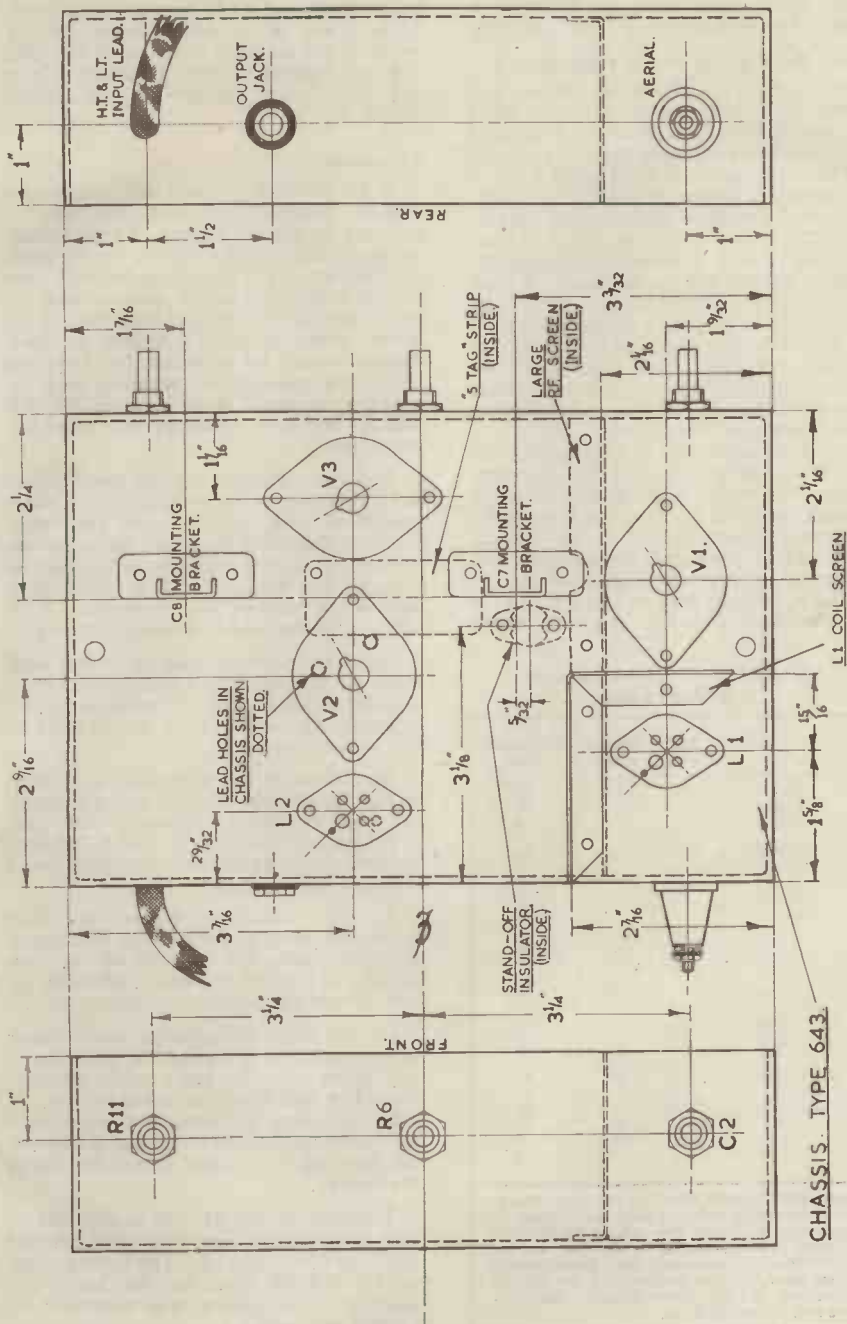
Detail for main chassis drilling and mounting. An Eddystone die-cast aluminum shell is used.
